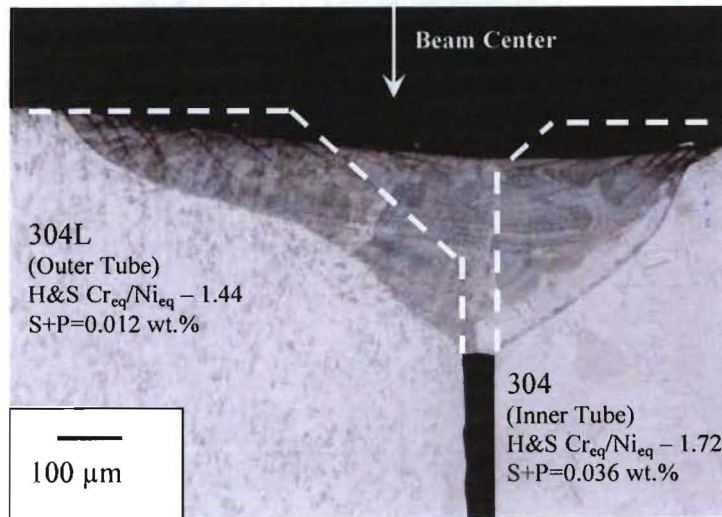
Cross-section of weldment and joint schematic (dashed lines) of the 304 to 304L stainless steel combination. Average power of the weld was 45 watts and the pulse width was 5ms.
